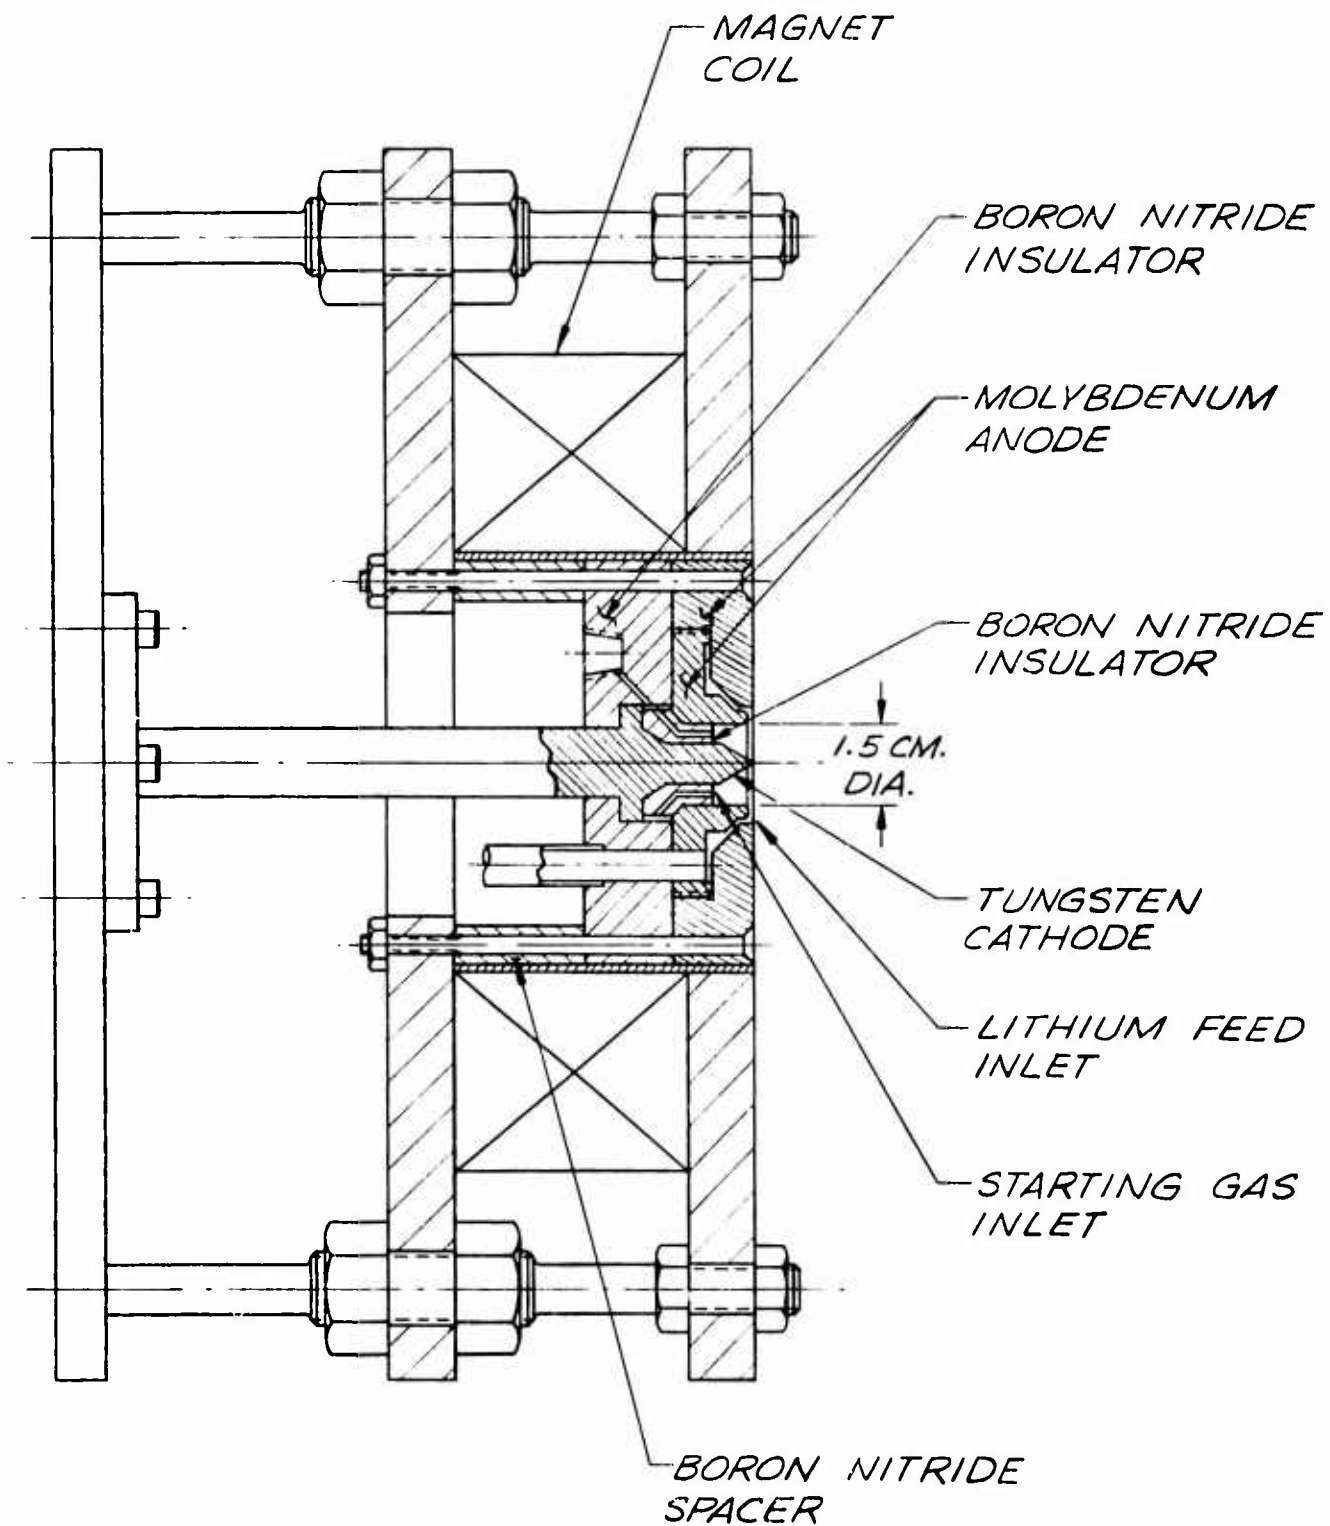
ASSEMBLY DRAWING OF LITHIUM ARC JET MODEL LAJ-AF-1
